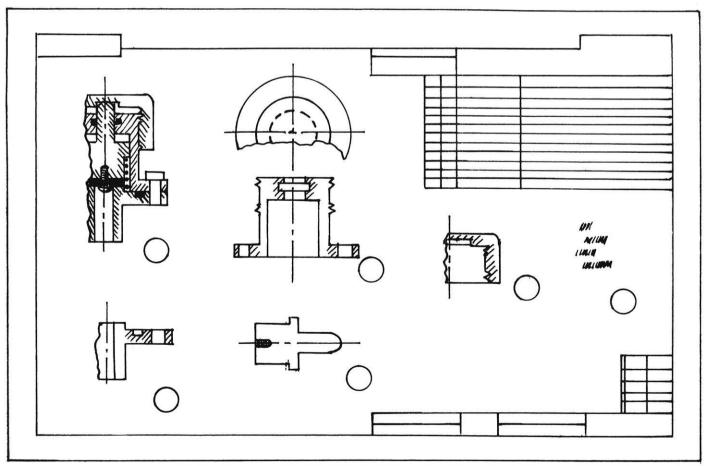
Examples of Simplified Drafting. Dimensions left out for clarity.
